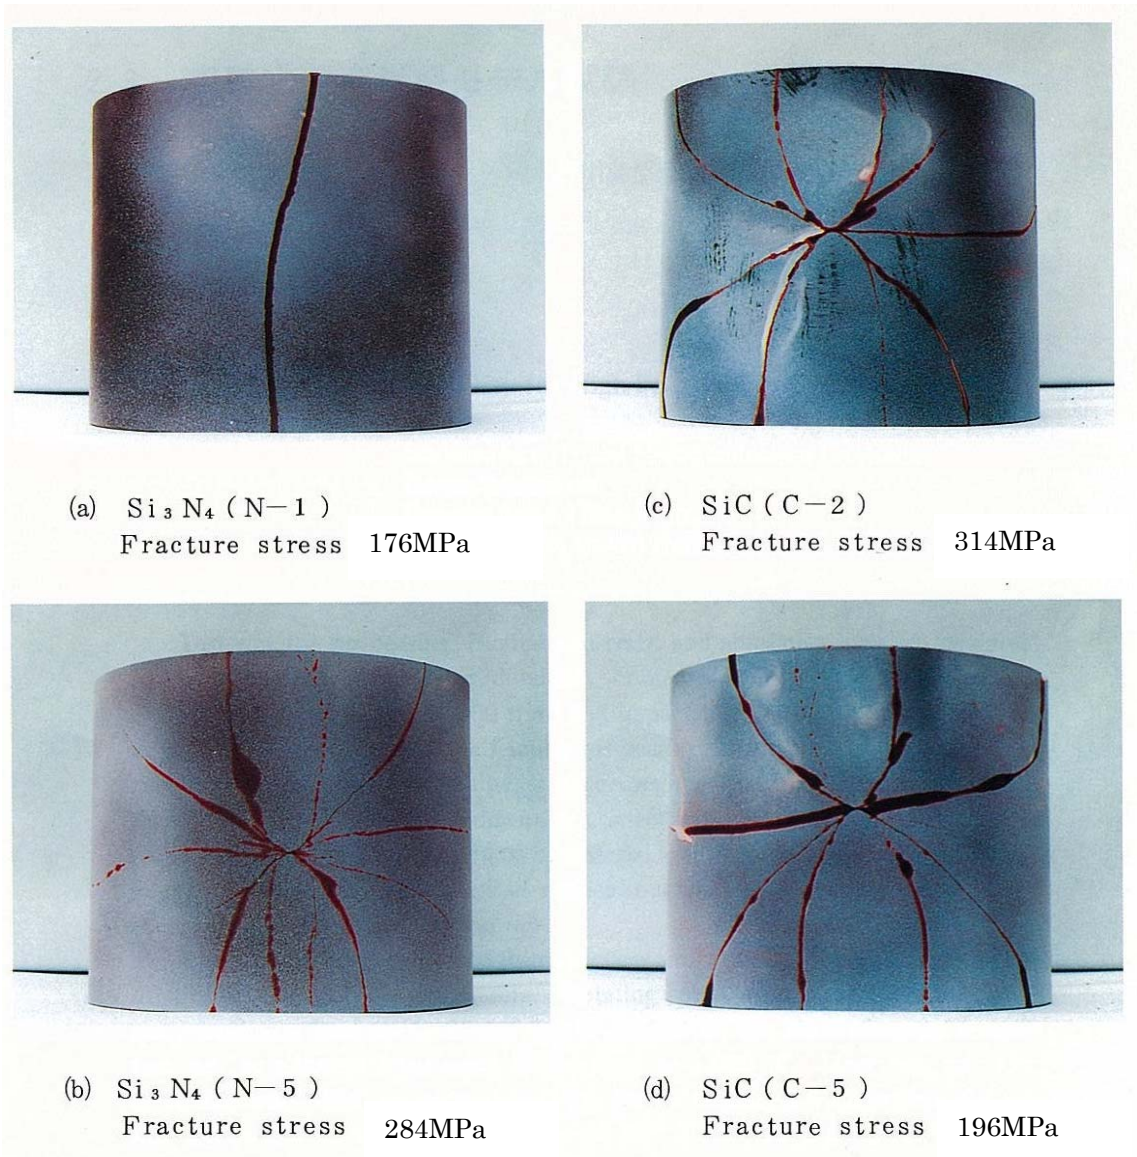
Examples of dye check inspections of the tested ceramic cylinders
